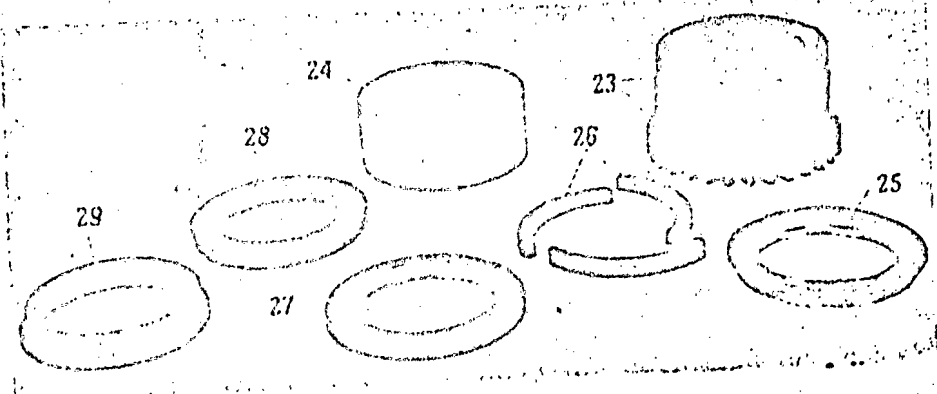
Parts to the Packing of the Recoil Brake Rod [457]
